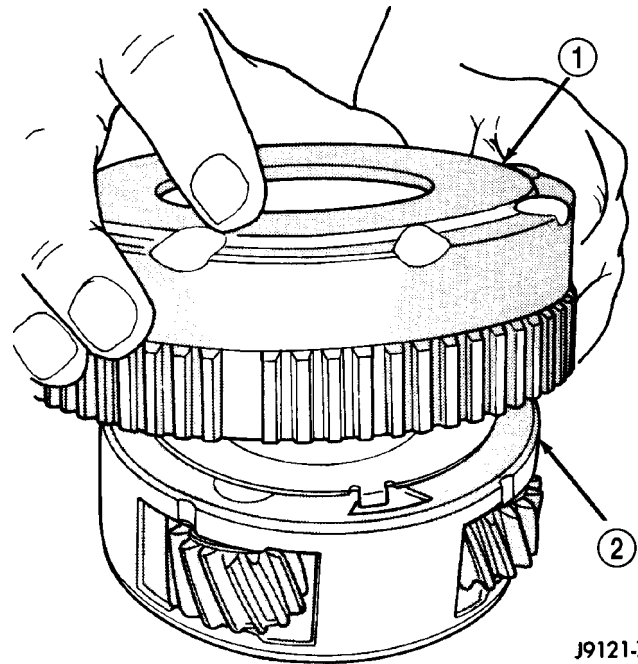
Installing Thrust Washer On Front Planetary Gear
